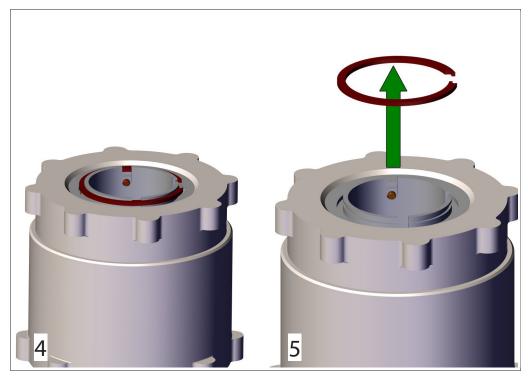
continued: Using the assembly aid to dismantle a mechanical seal cartridge
